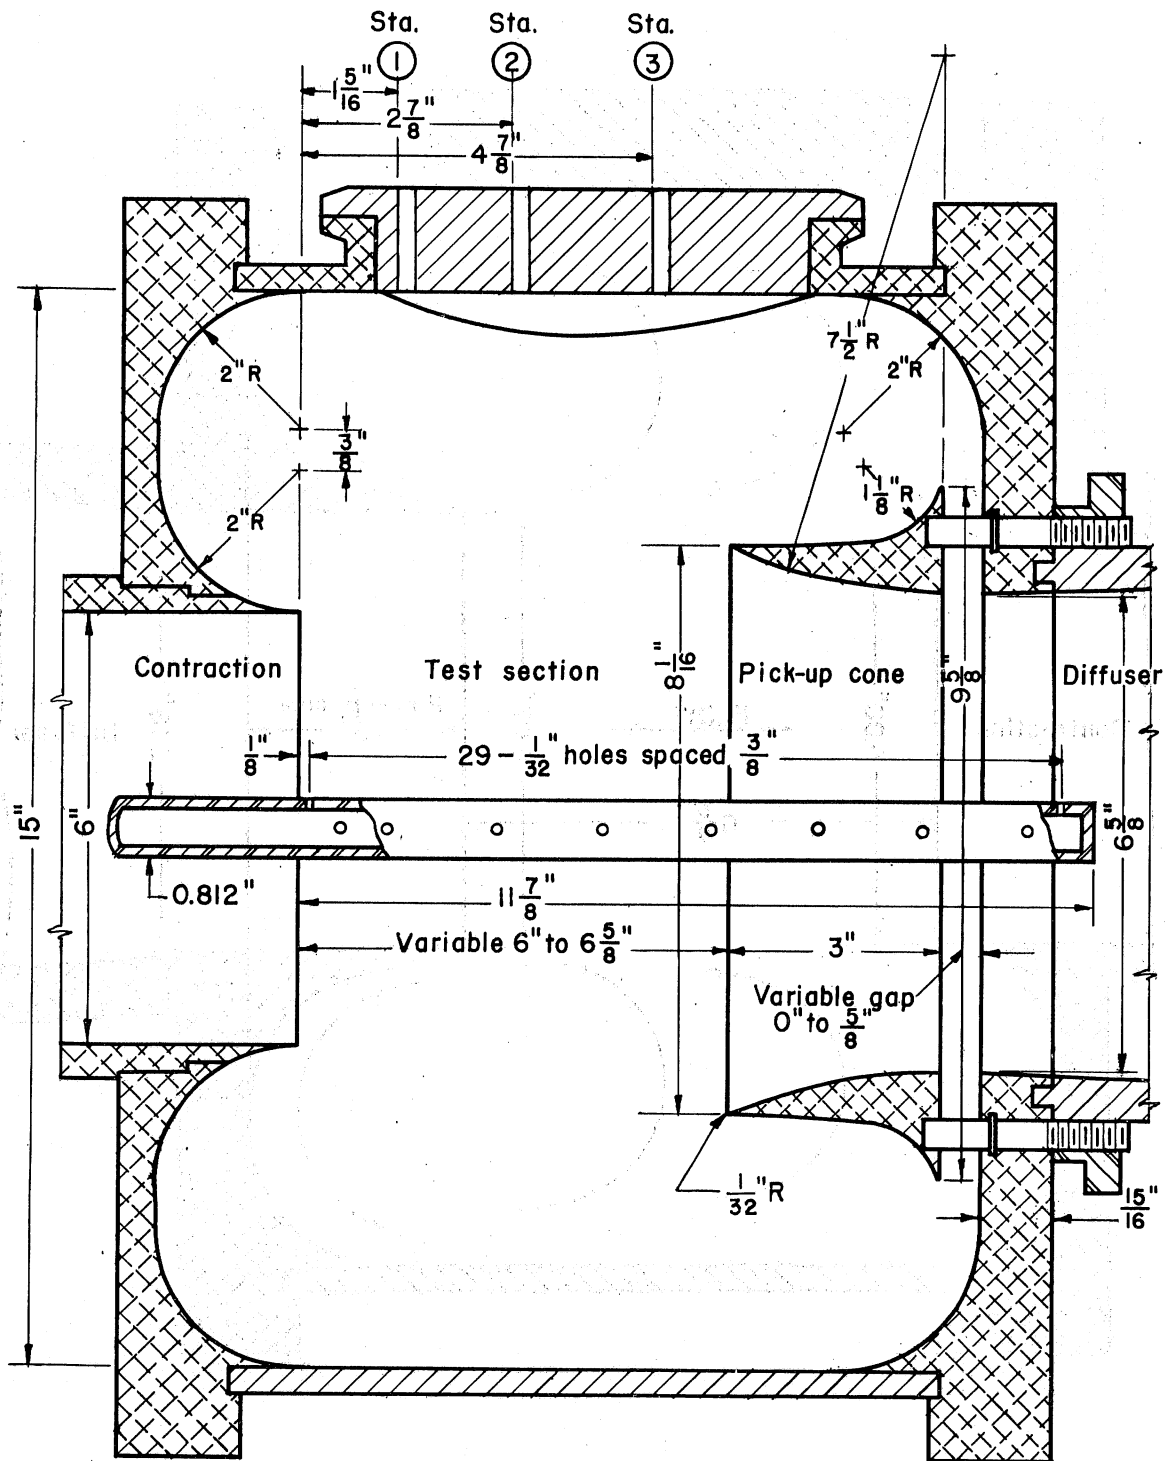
Model Open-Jet Test Section with $6\frac{5}{8}$ -in. Pick-Up Cone and the Contraction Dynamometer Shaft Extension Used for Measuring Axial Pressure Variation
